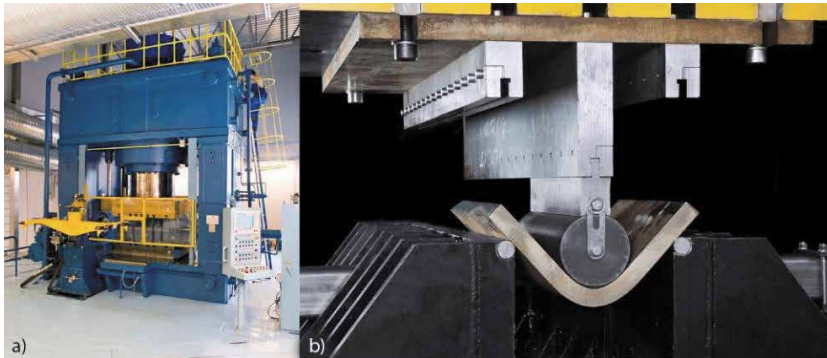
a) Hydroforming machine on the Tornio campus; b) bending of a thick steel plate.
